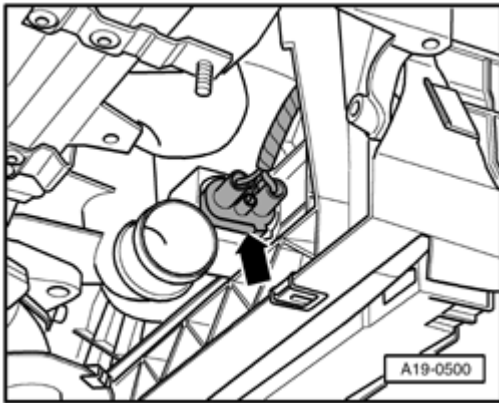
Disconnecting Electrical Connector To Coolant Fan
